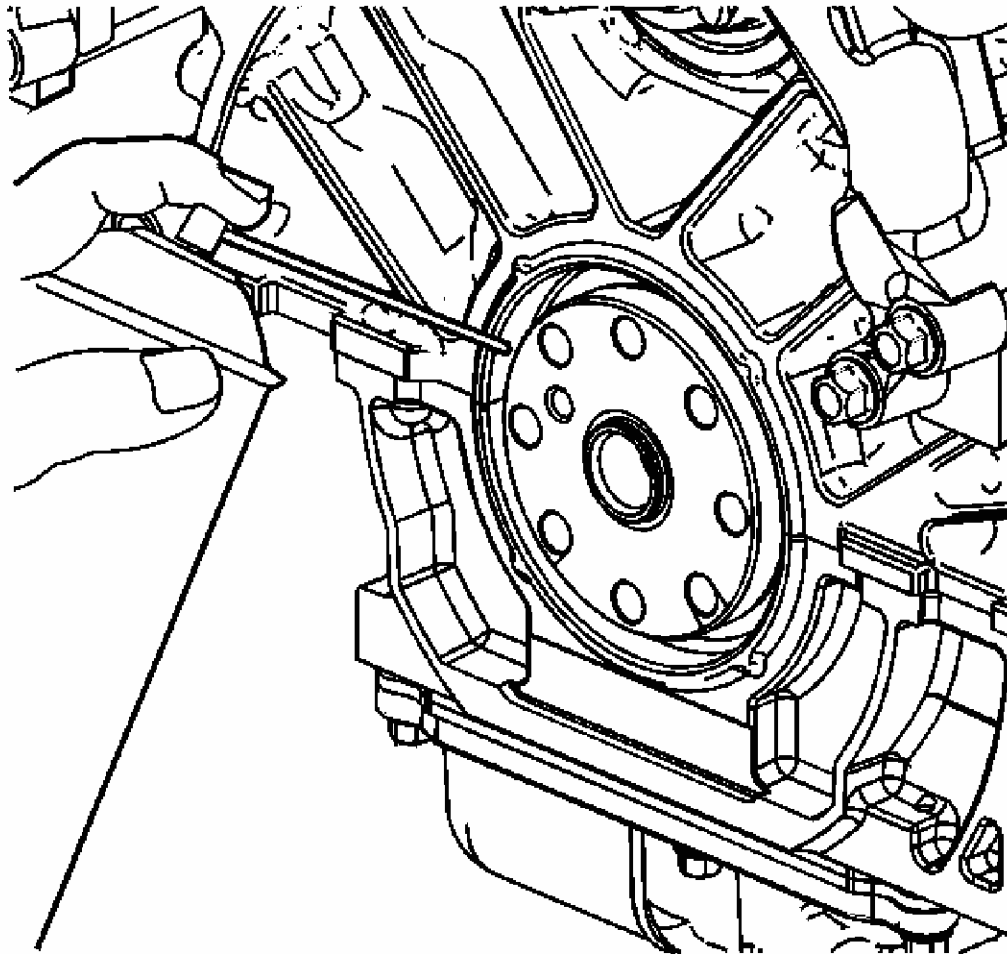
Cleaning Rear Crankshaft Seal Bore
